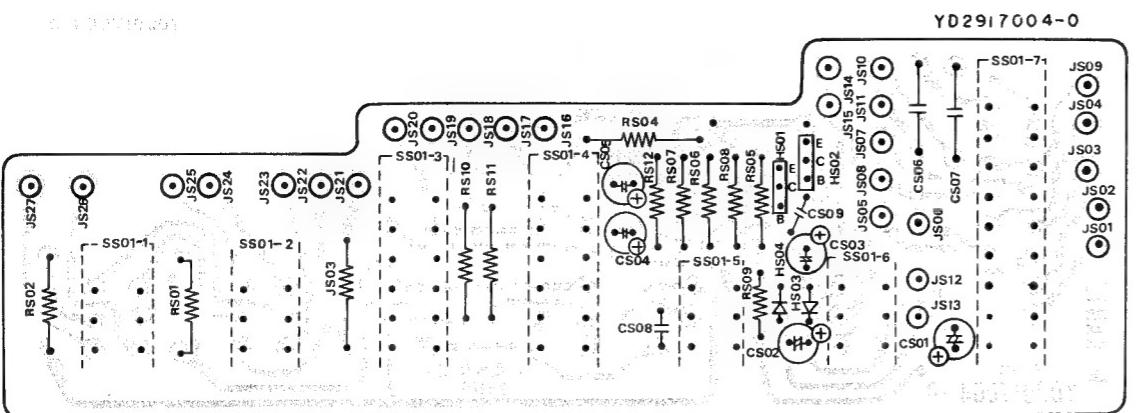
Dolby FM, Mono L, R, Multipath and Monitor Switches Assembly PS01 Component Locations
